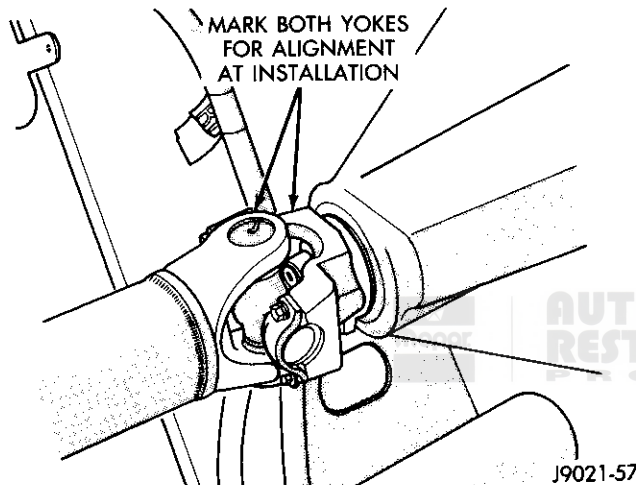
Mark Propeller Shaft And Axle Yoke For Assembly Alignment
